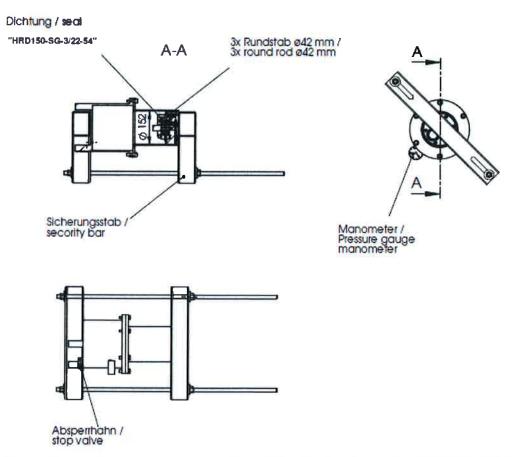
View and cross-section of the test setup with HRD150-SG-3/22-54 - manufacturer's drawing.
